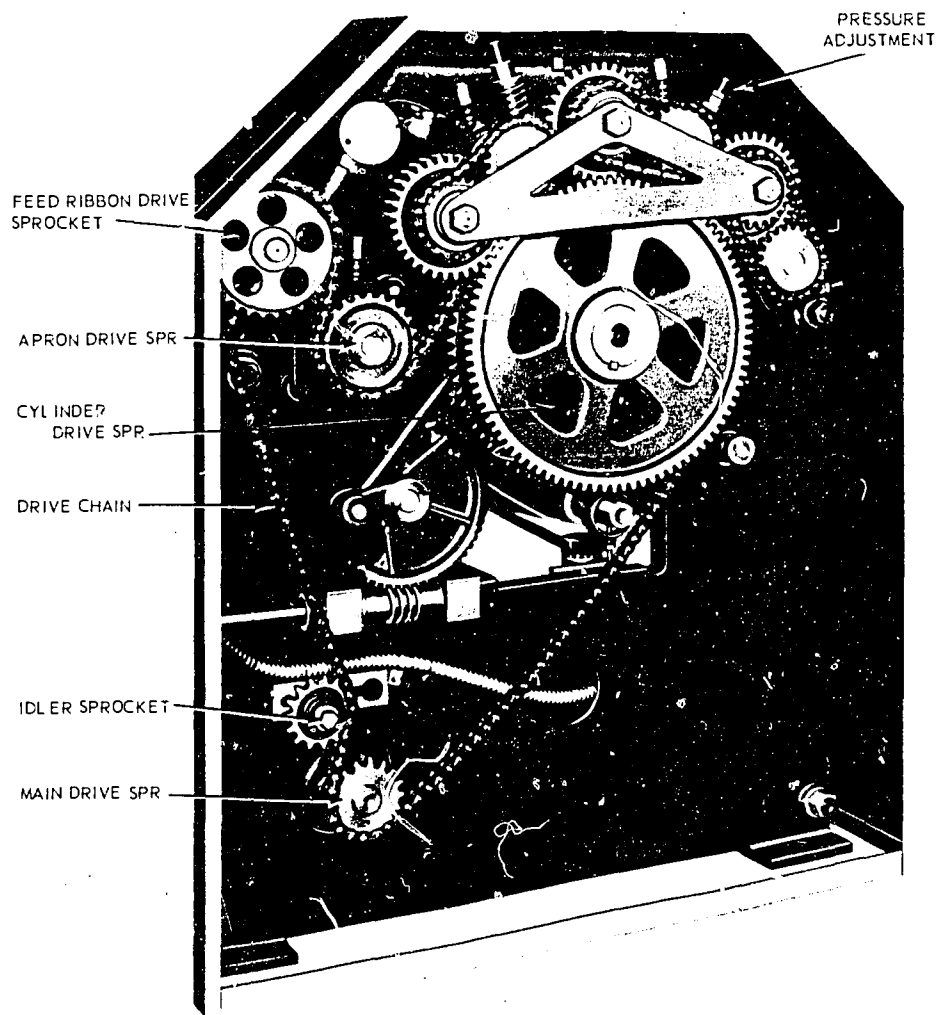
Pressure roll adjustments and gears in right-hand frame.
